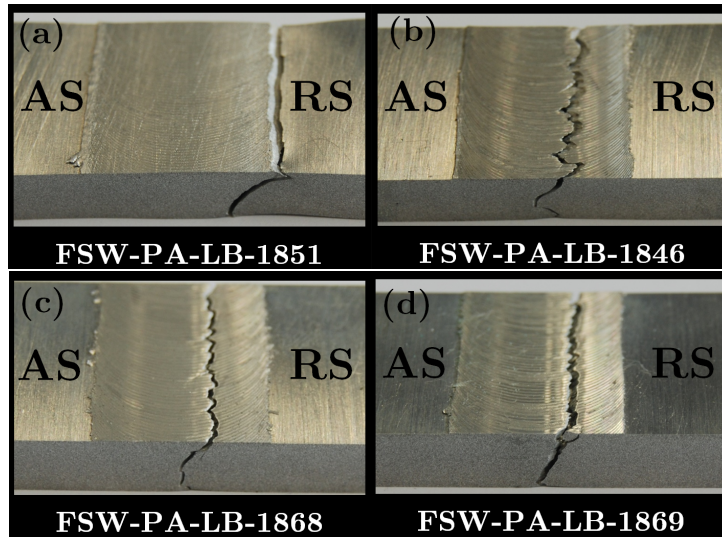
Cross-sectional fracture appearance resulting of the tensile test.
